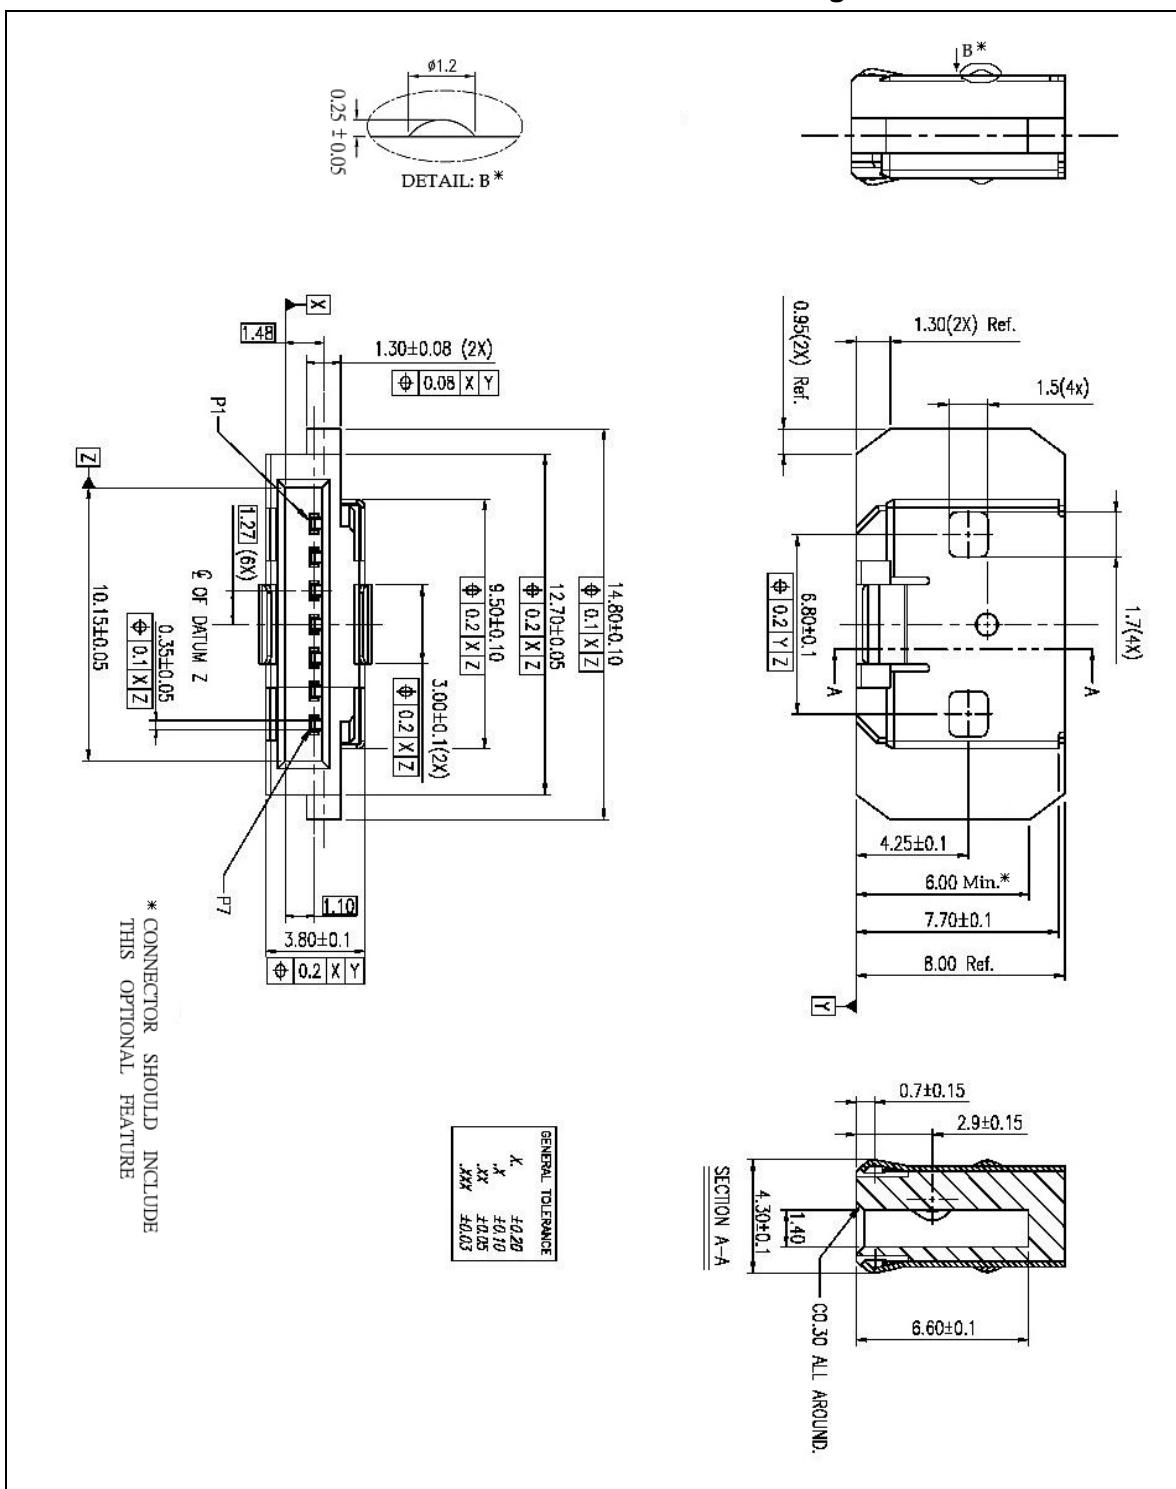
Mechanical dimensions of External Serial ATA cable receptacle assembly
